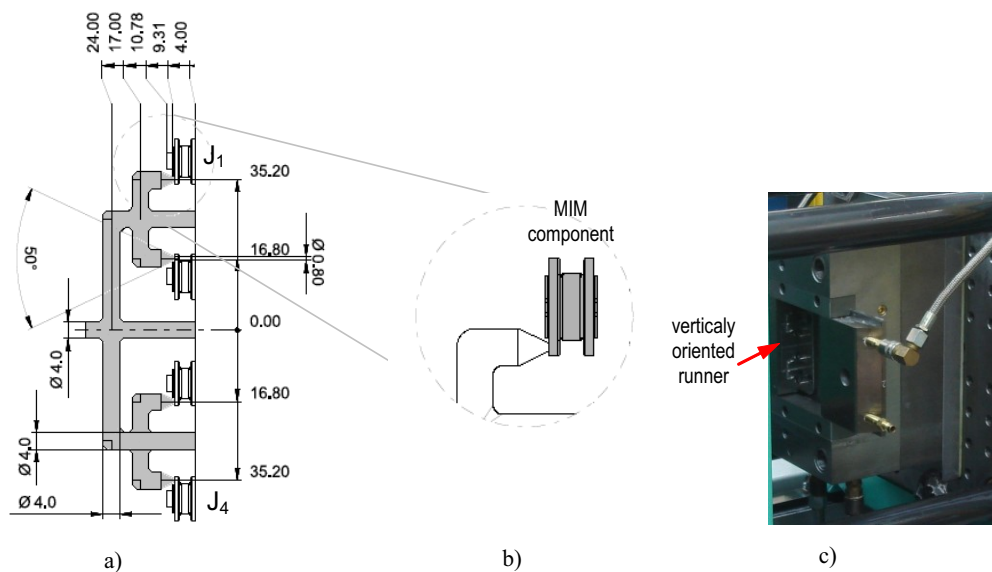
The runner system dimensions, a); MIM component detail, b); and experimental four-cavity split mold, c)
